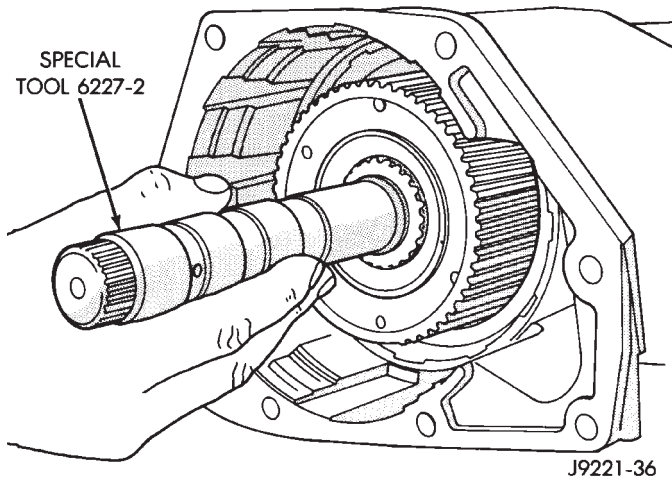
Checking Alignment Of Overdrive Planetary Gear And Overrunning Clutch Splines
